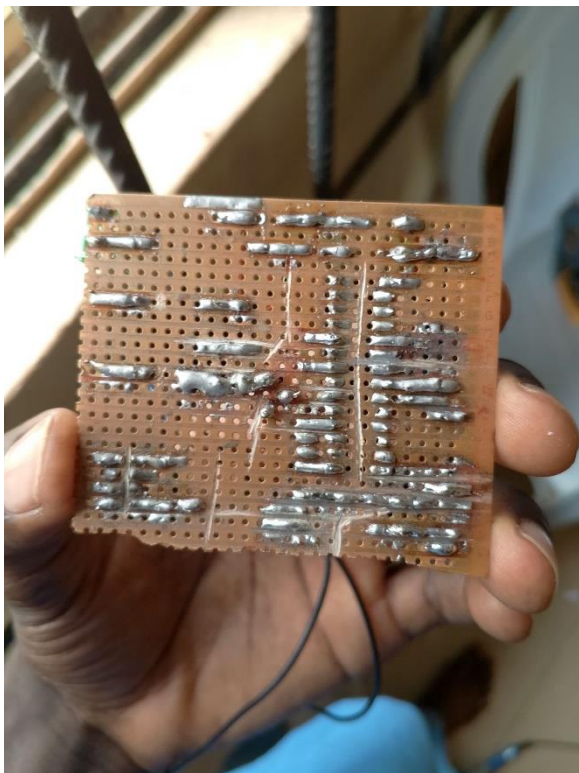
SOLDERING OF COMPONENTS ON THE VERO BOARD
